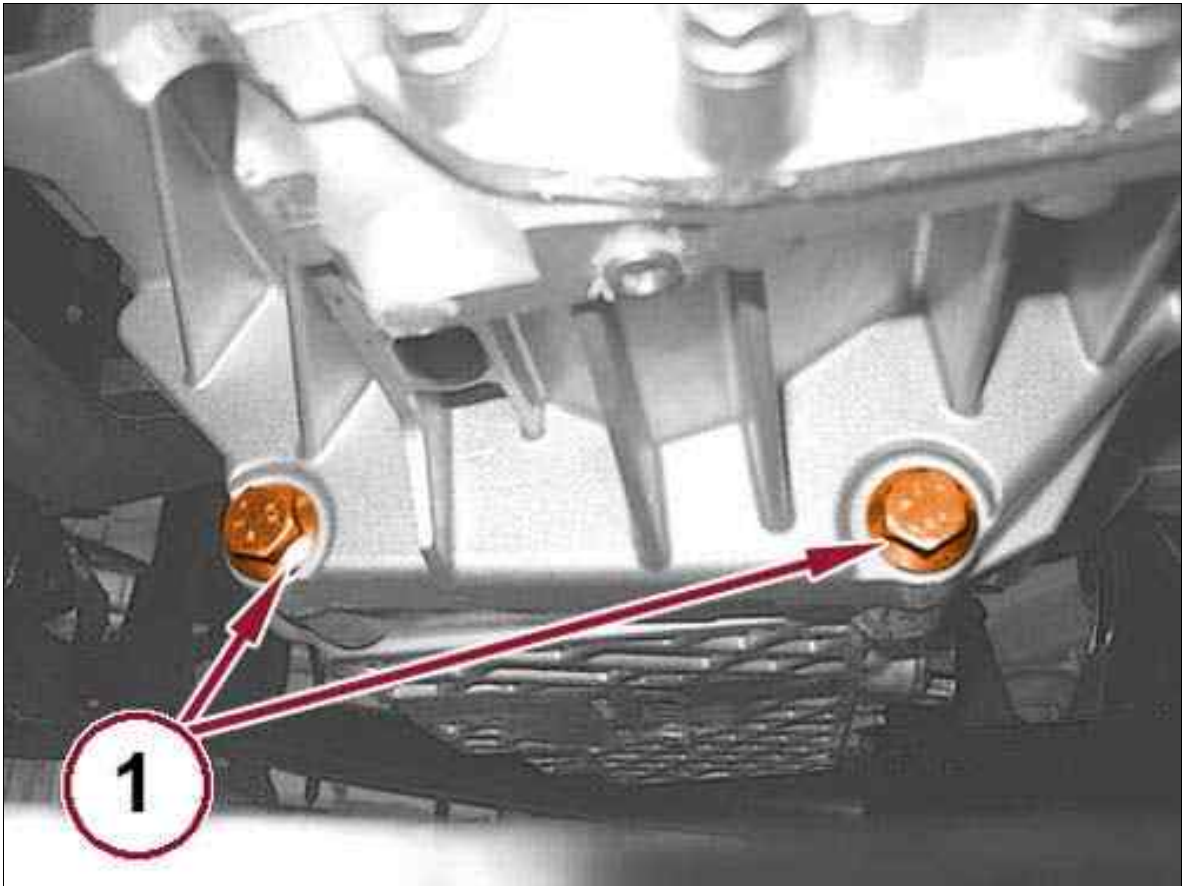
Lower Dust Cover, Upper Dust Cover & Engine To Oil Pan Transmission Bolts
